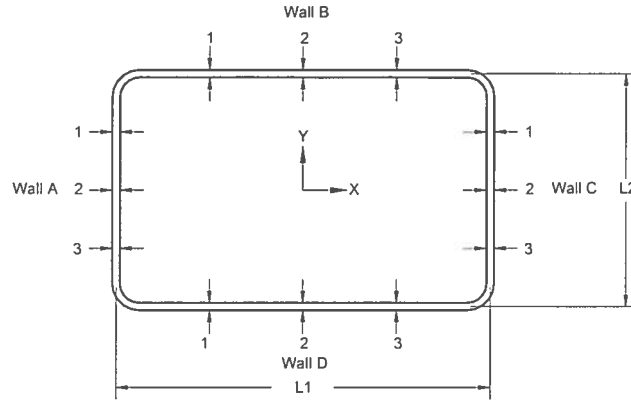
Details of dimensions taken for measurements on a laser consolidated rectangular cutting pattern.
